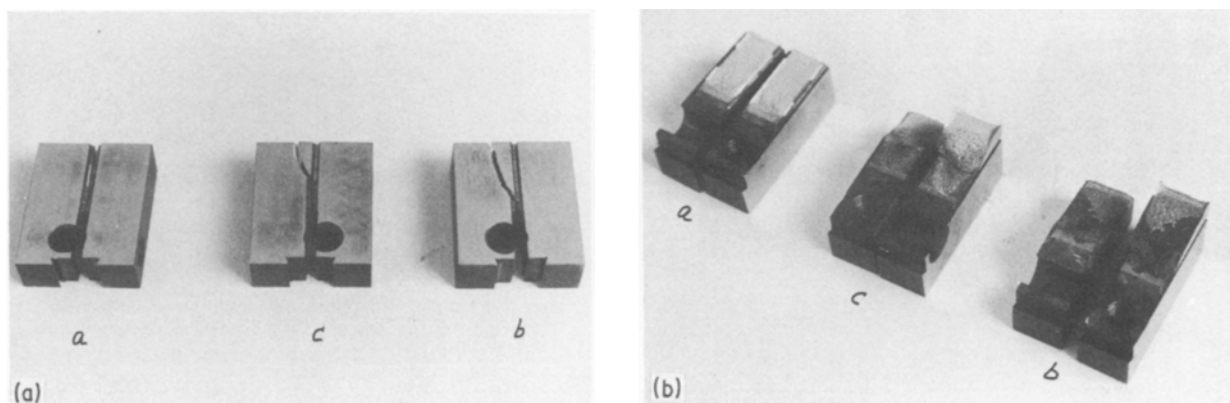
Crack paths in WOL-tested maraging steel specimens.
